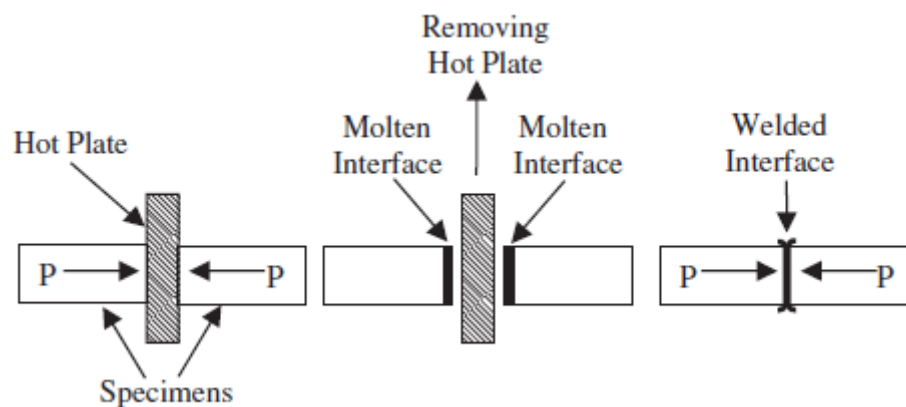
Hot-tool welding of thermoplastic composites [58]
